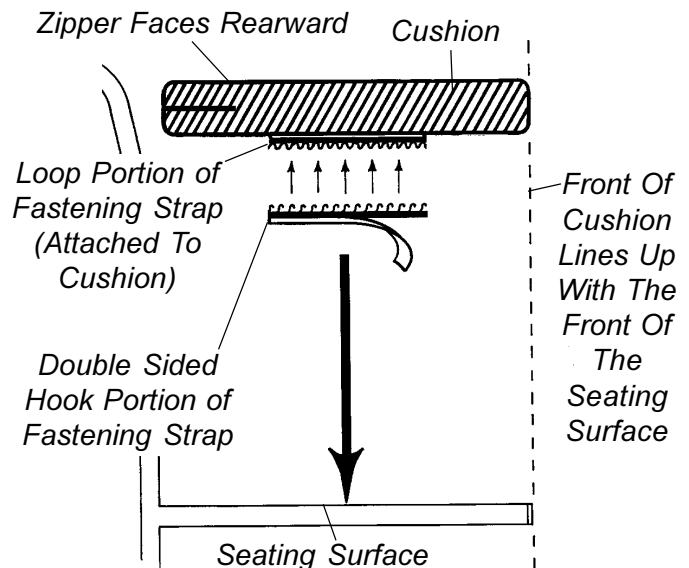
ATTACHING THE CUSHION TO THE SEATING SURFACE
